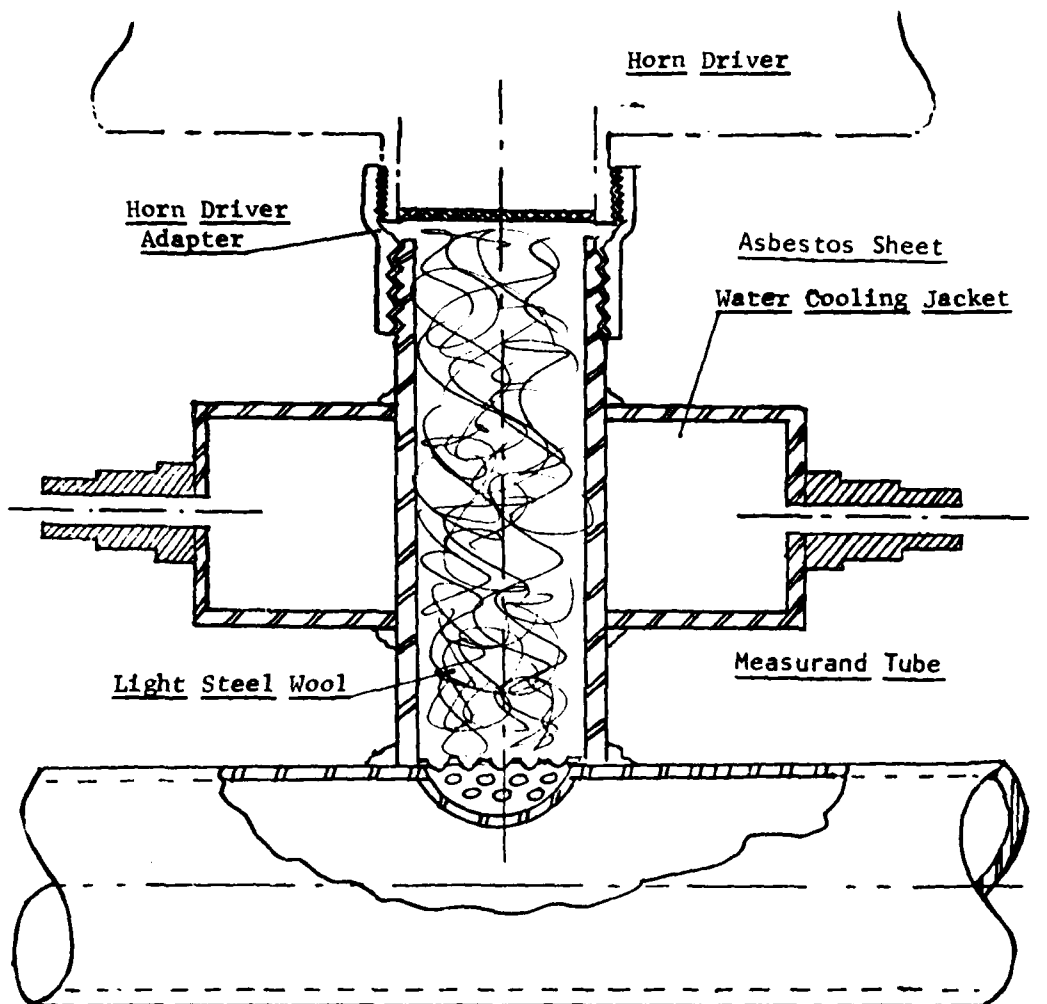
Attachment of the Horn Driver to the Measurand Tube
